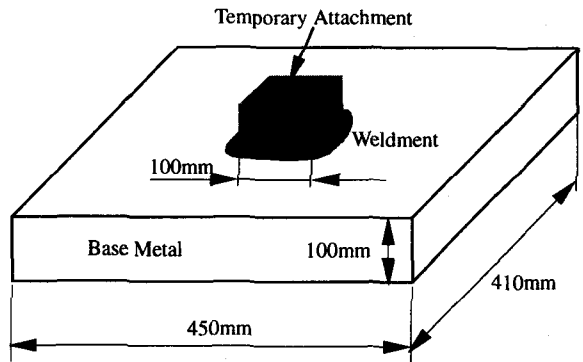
Schematic drawing of specimen for gouging mock-up test.
